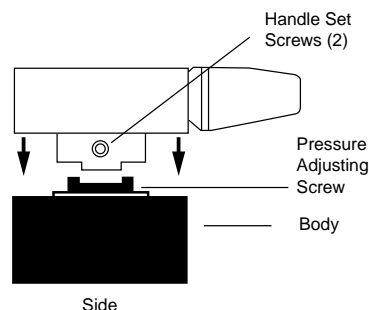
Valve handle acting as wrench to adjust valve pressure adjusting screw.
